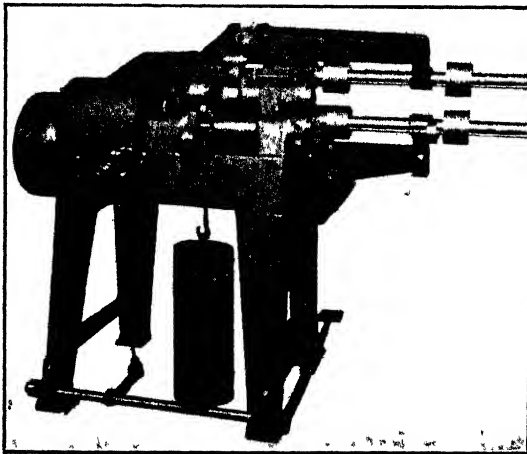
The rear of a beader and flanger showing the backshaft cam which applies the working pressure, and the shaft support arrangement for two operations on a small-diameter muffler body.
